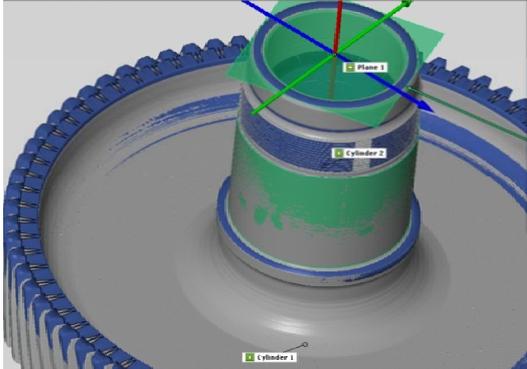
Connecting standard model 3D-CAD with obtained geometry of gear
